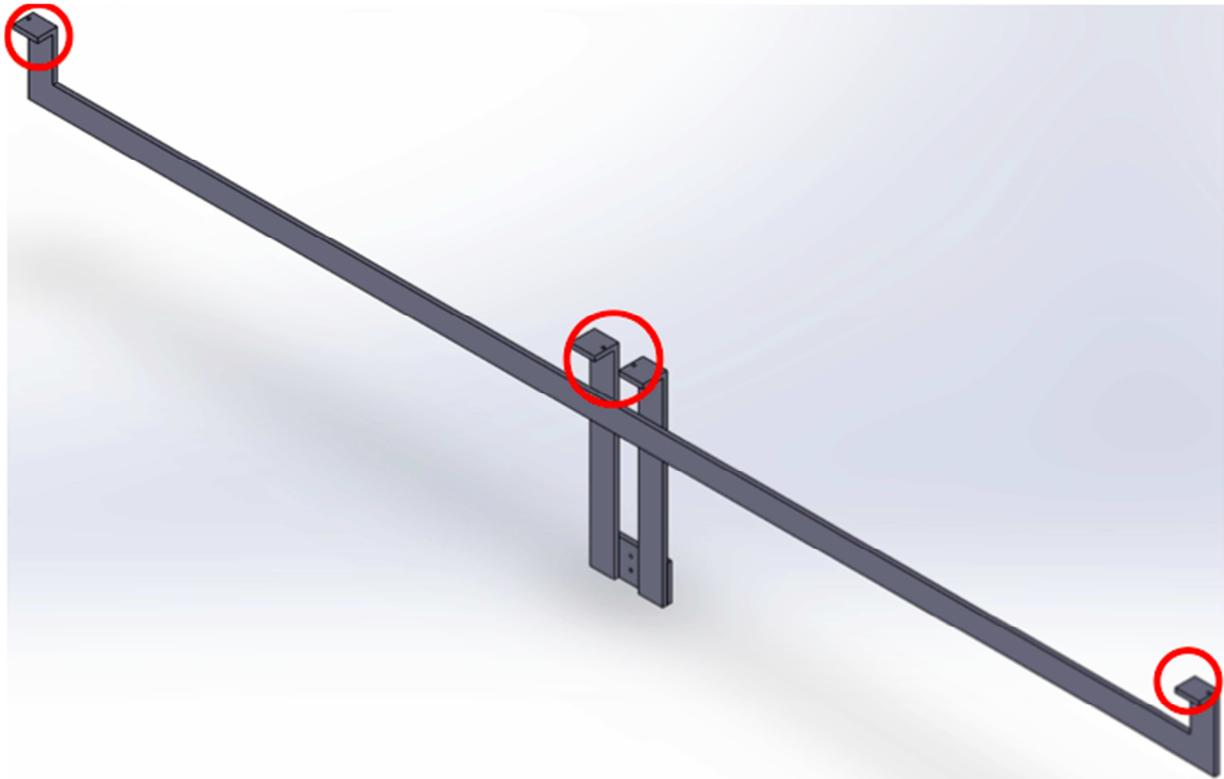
Final design of mounting assembly. Full assembly consists of four individual pieces each out of 3/16 inch aluminum flat bar. Individual pieces will be welded together.
